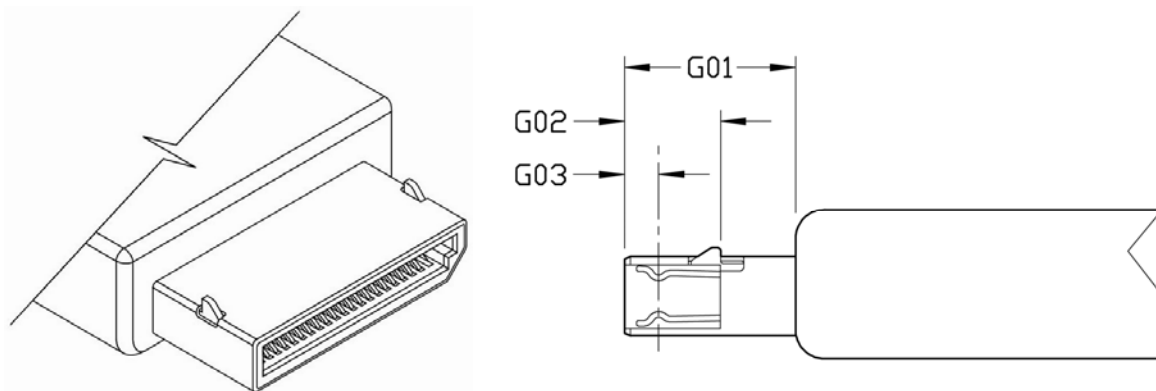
FREE CABLE ACTIVE LATCH
